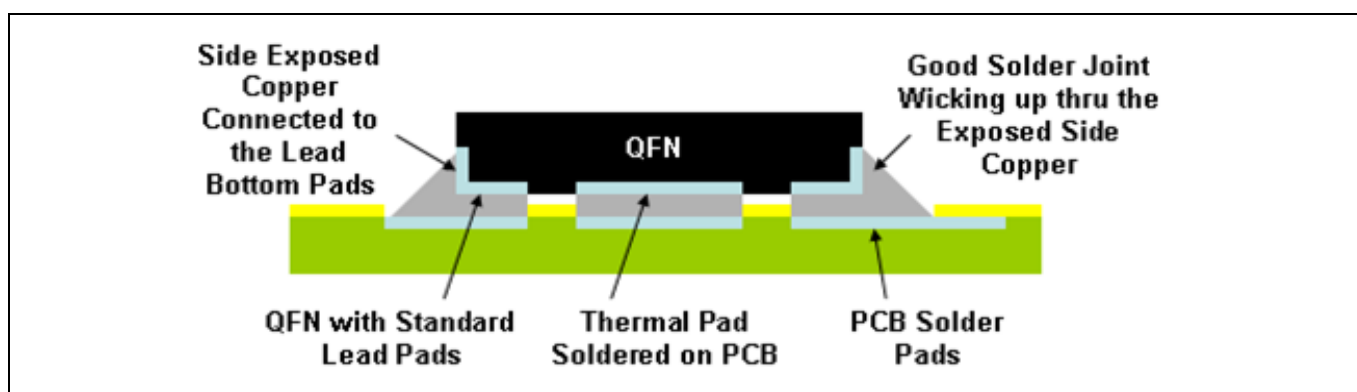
Cross-section view of solder joint on standard QFN without pull-back design (optimal solder joint)
